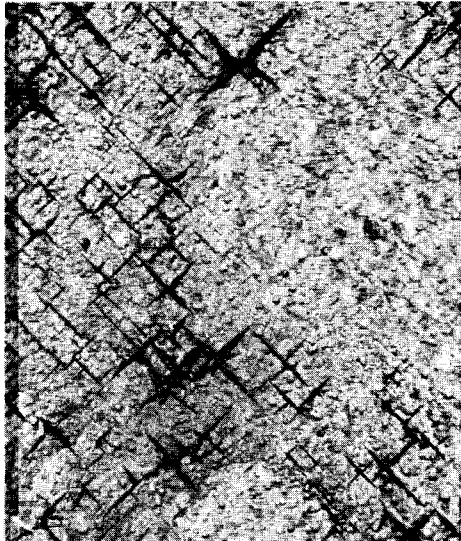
corrosion fatigue cracks at the surface of a shot peened alternating torsion specimen after fracture ($27 \cdot 10^6$ cycles , $\tau = 100 \pm 100$ N/mm² , NaCl 1/1 sprayed)
